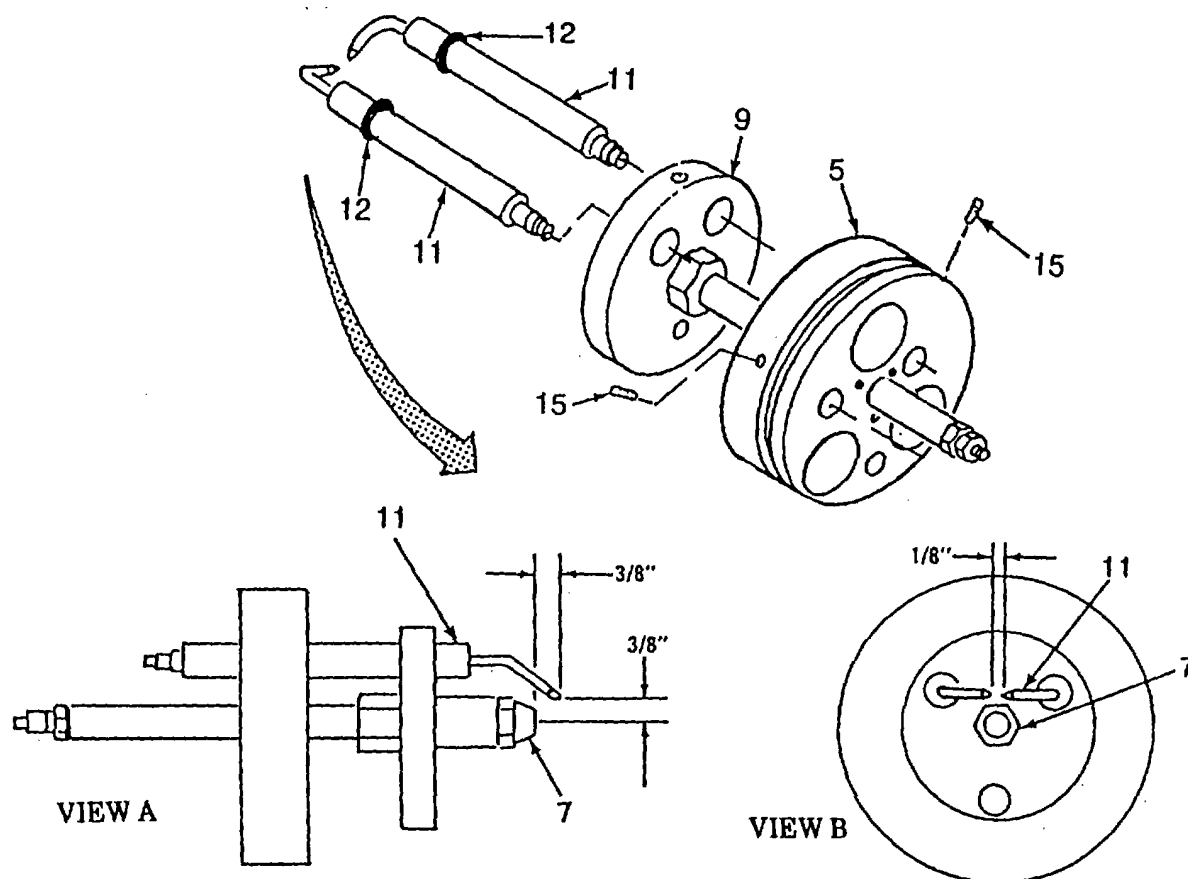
Burner Assembly (Sheet 4 of 5)
